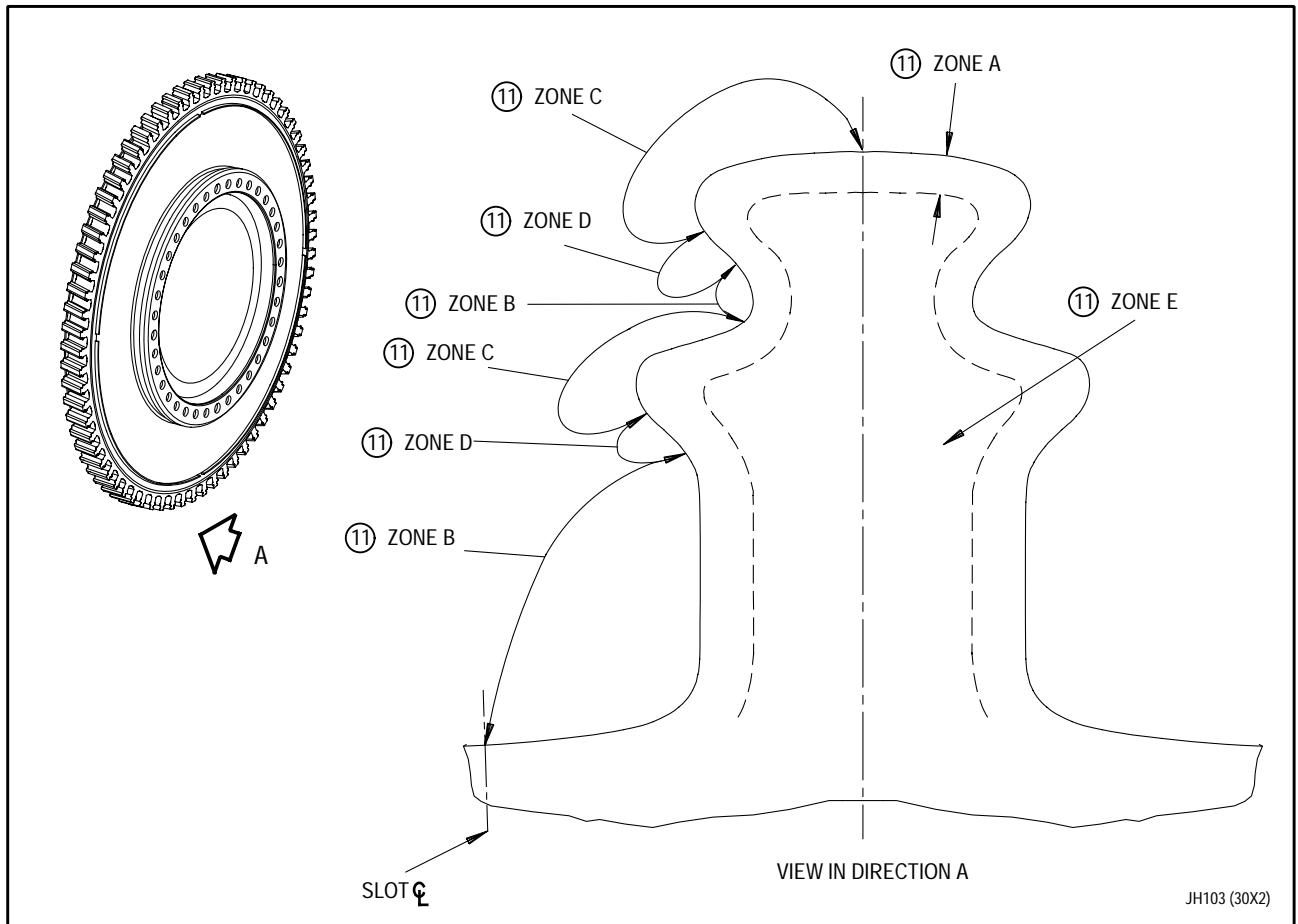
First Stage Turbine Disk - Inspection (Sheet 2 of 3)
